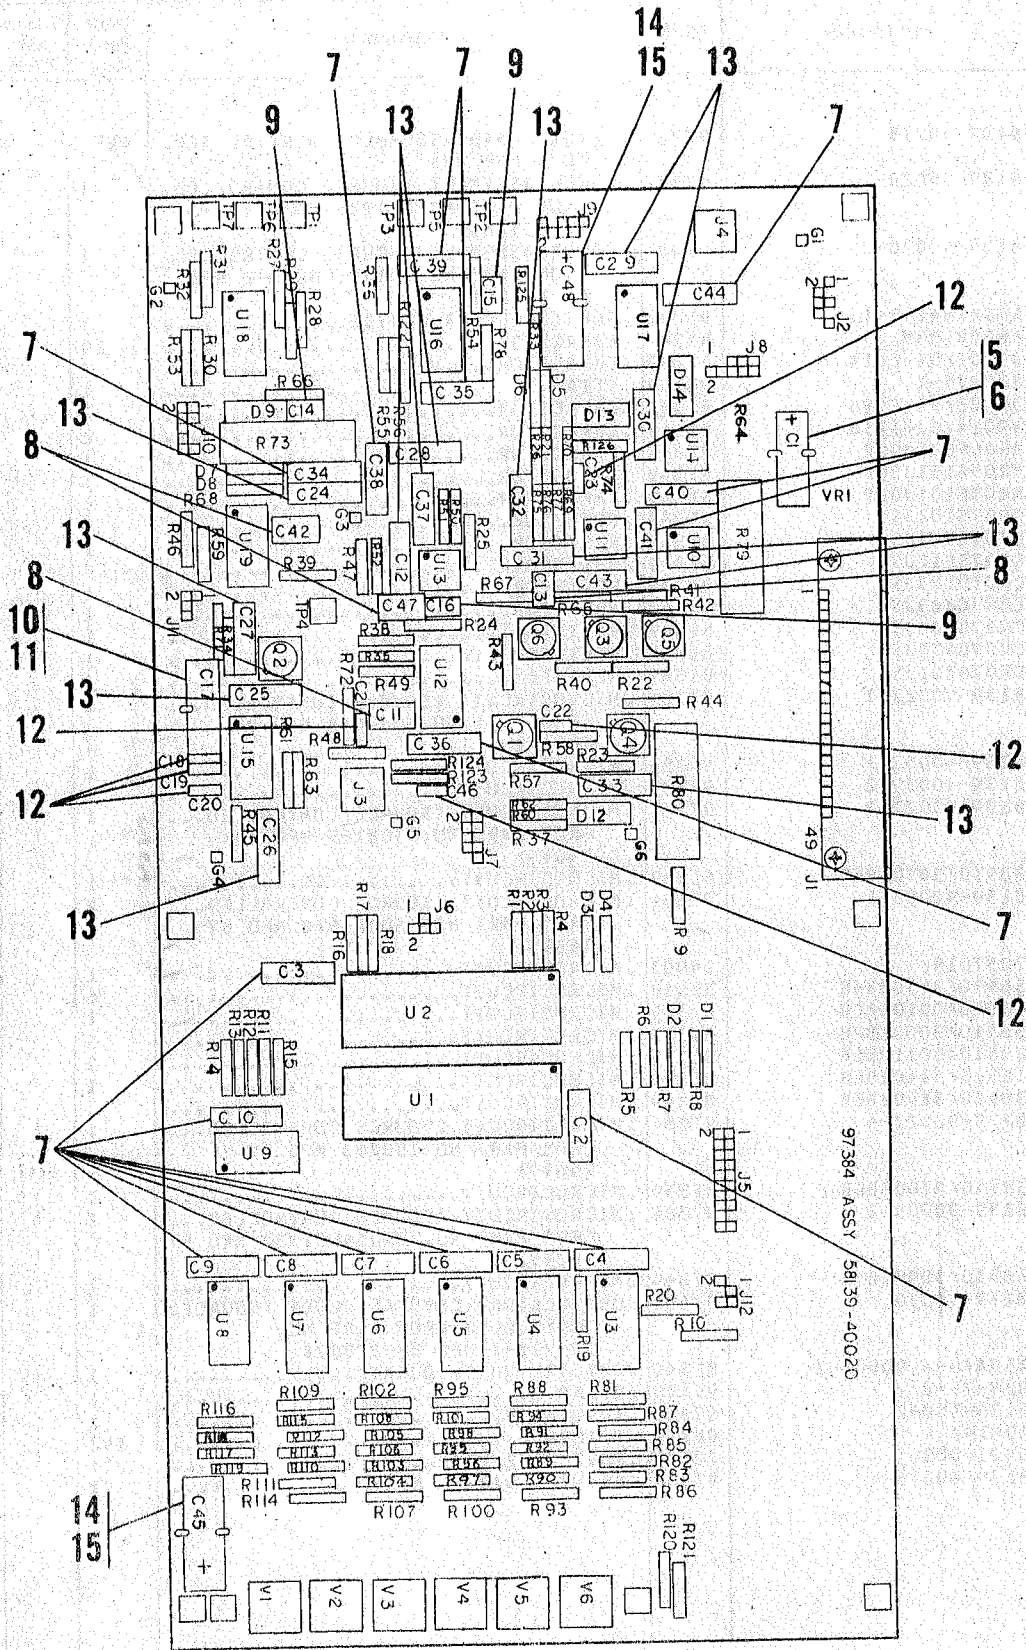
Circuit Card Assembly, Front Panel Interface (Sheet 1 of 4)
